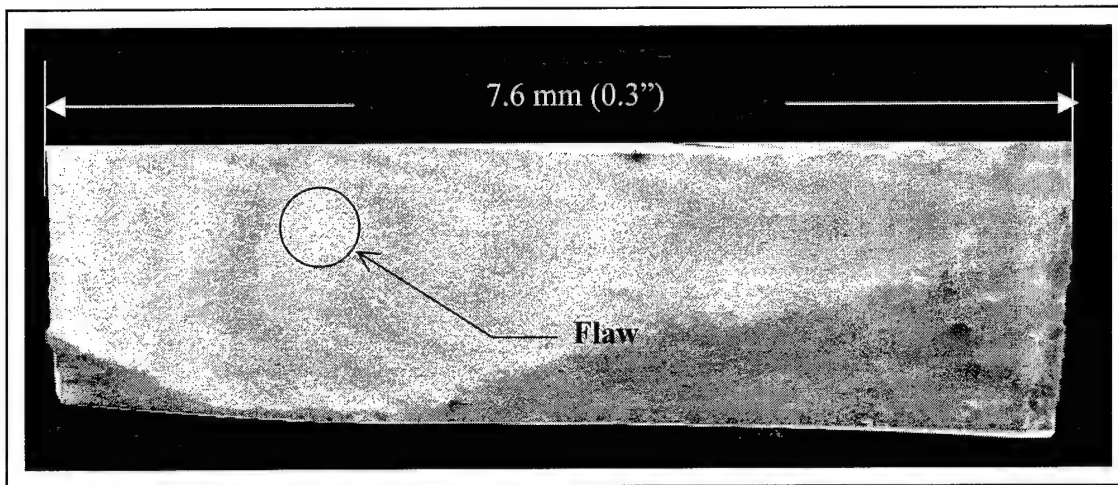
Specimen B3 (F/G, 20:1 taper) fracture surface: fatigue testing at 540 MPa (78 ksi). Note flaw at center of surface. Failure occurred at 31.6k cycles
